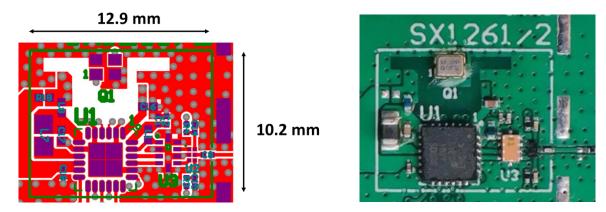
Johanson Technologies P/N: 0900FM15K0039E - IPD PCB Design and Layout
